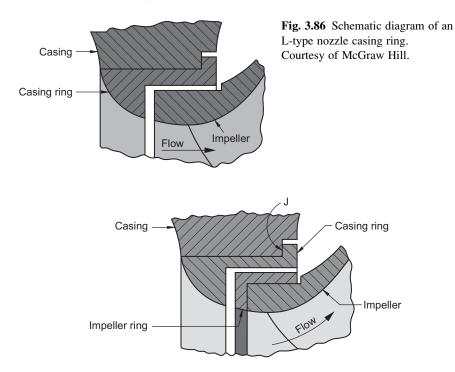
Schematic diagram of an L-type nozzle with double casing ring. Courtesy of McGraw Hill.
